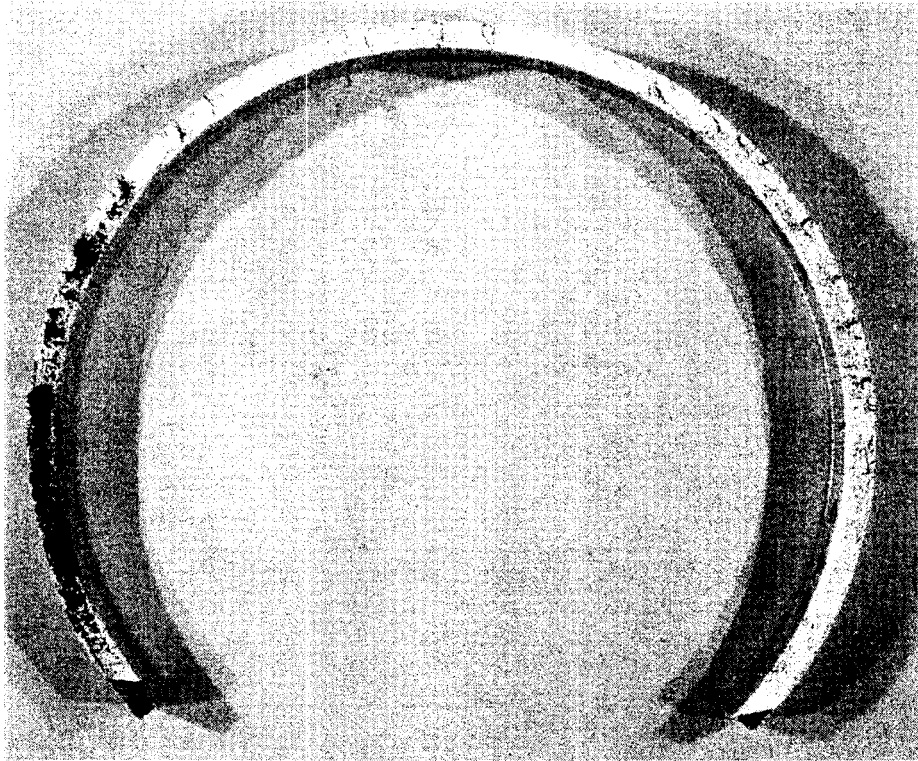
Typical Through-Thickness Weld Toe Crack.
